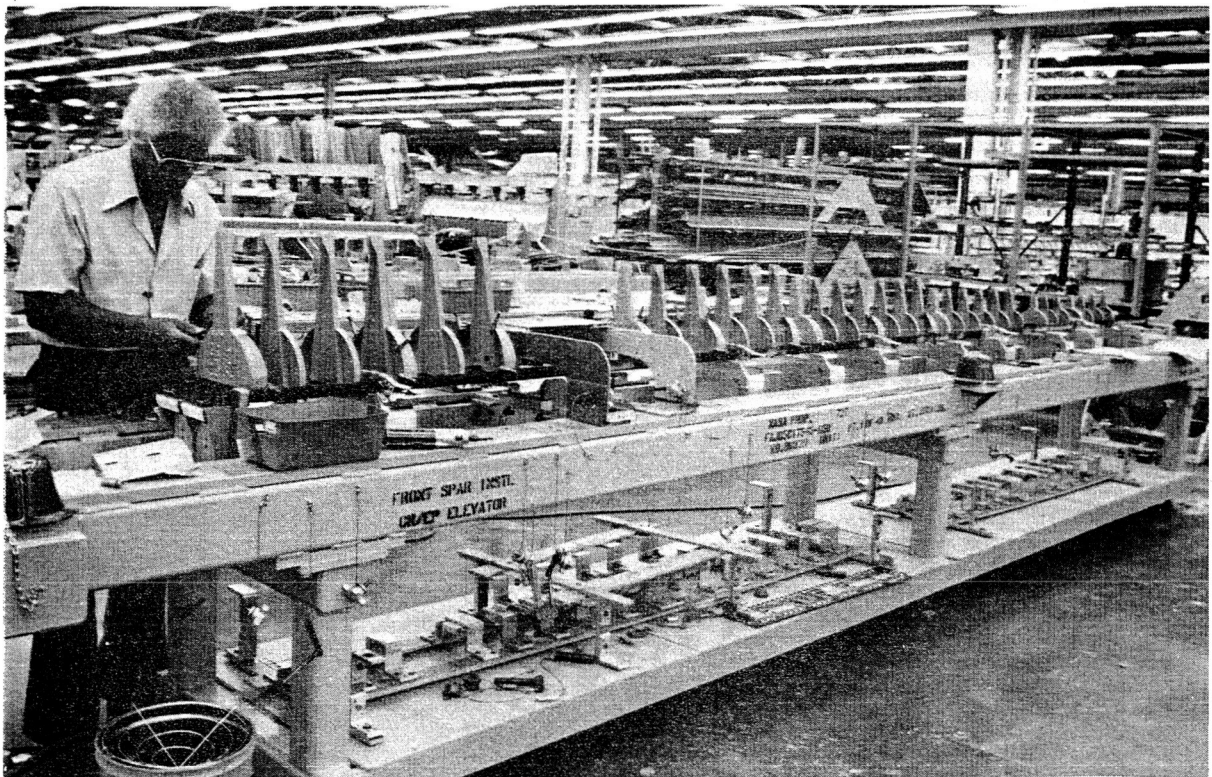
Front-Spar/Leading-Edge Assembly Tool
